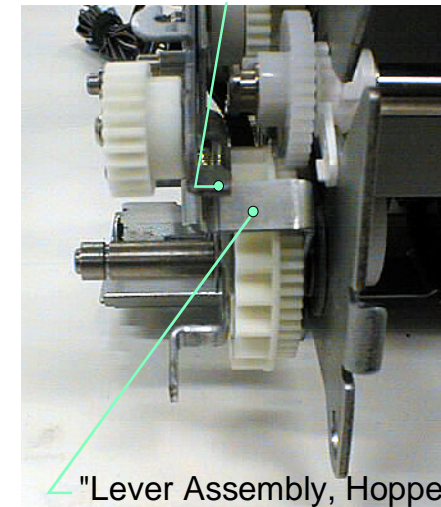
Check Point After installing "Lifter Gear Train Cover Assembly"
